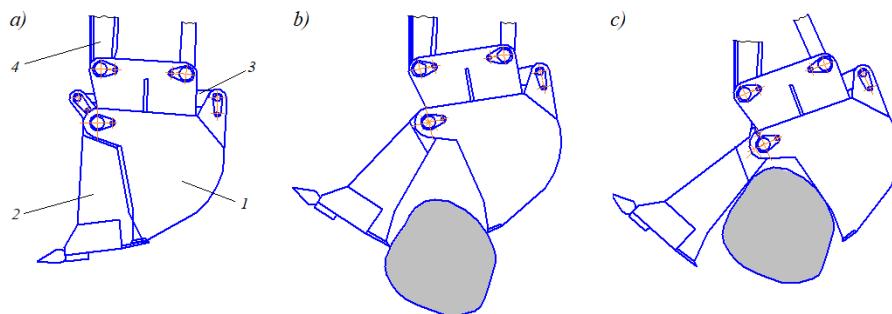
Technological operations of a single-bucket excavator equipped with a hydraulically controlled jaw for development of coarse elasic soils of mudflows: a) - is a general view of an opening jaw bucket; b)- filling process; c) - unloading process, 1-bucket; 2- jaw; 3- hydraulic cylinder; 4- handle
